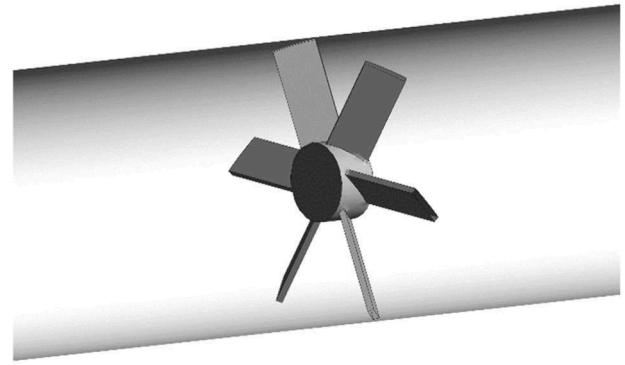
Cutaway drawing of the swirler geometry inside the pipe.
